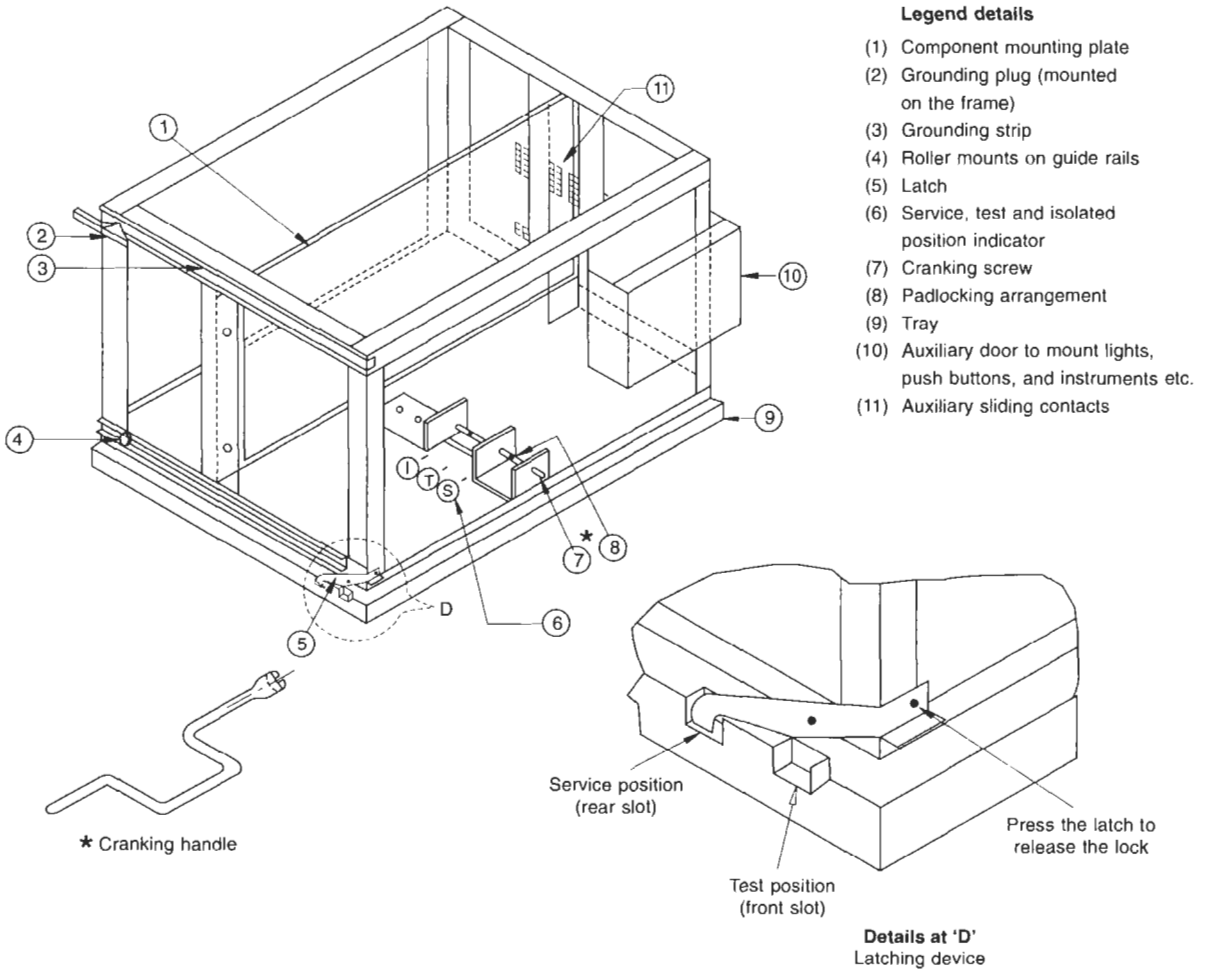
Front view of a typical withdrawable chassis (trolley)
